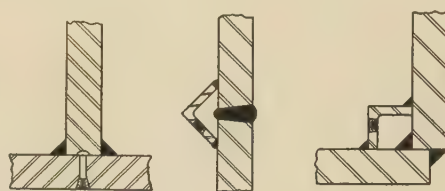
Arrangements for pressure testing of welds for oil-tightness
